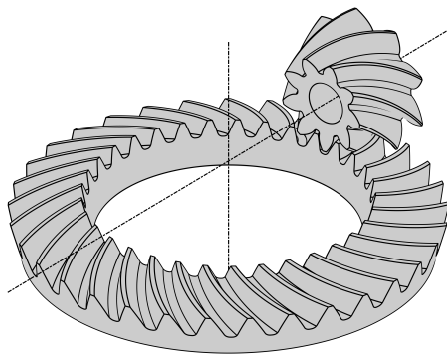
An example of a face-milled spiral bevel gear pair.
